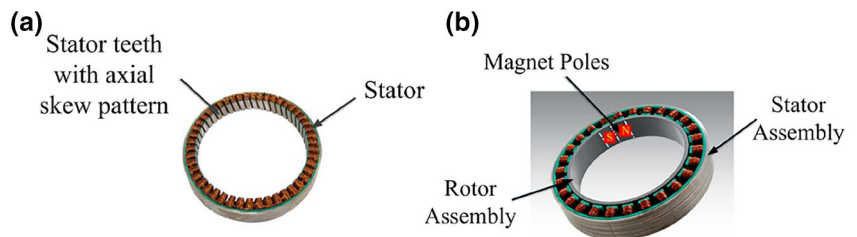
a) A slotted machine rotor and (b) a slotless machine rotor [37]
